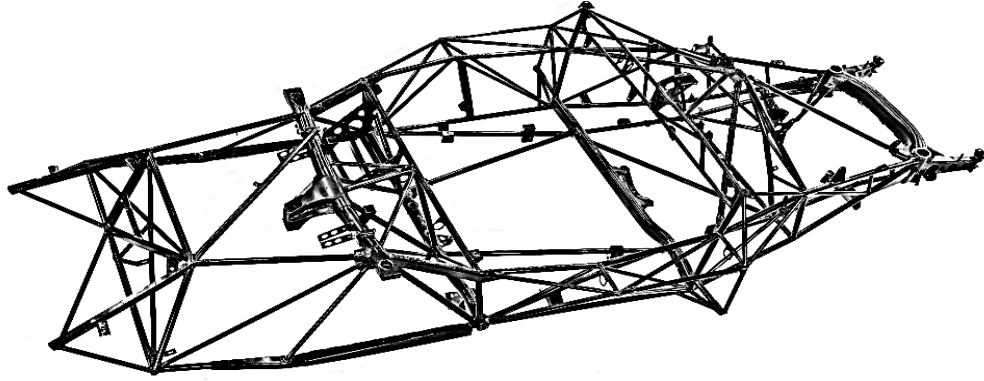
Mercedes 300 SL space frame chassis (300sl.org)
